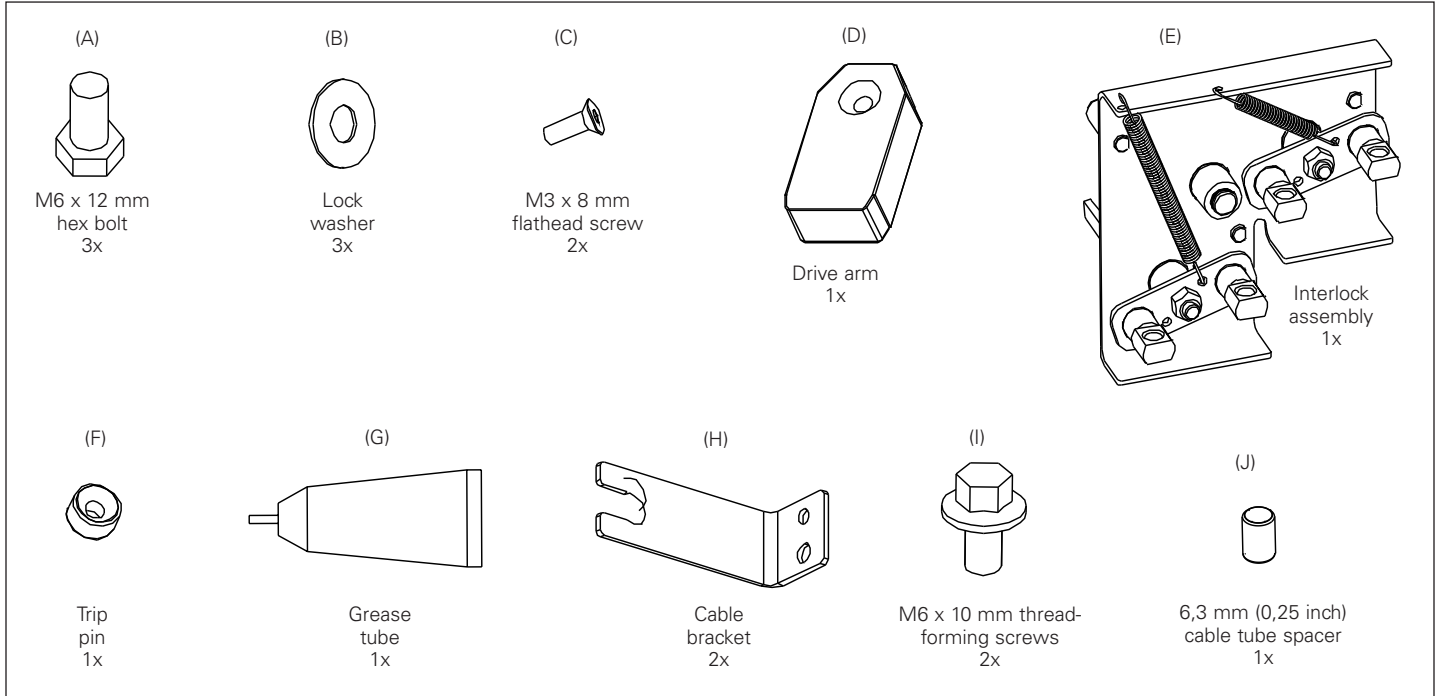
Interlock kit part identification, includes parts to install on a single drawout Type NF frame breaker and cassette (does not include cables)
